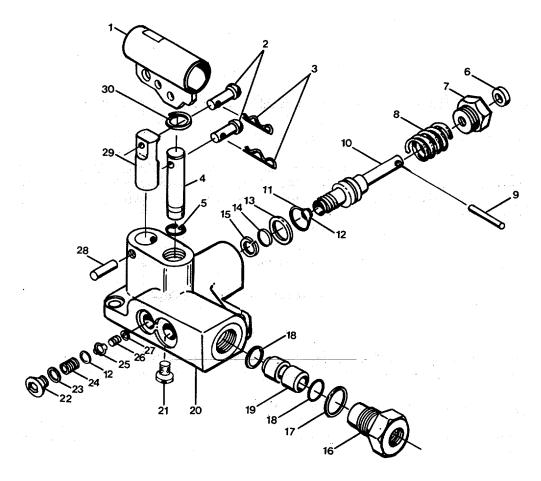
Hydraulic Hand Pump Assembly.
